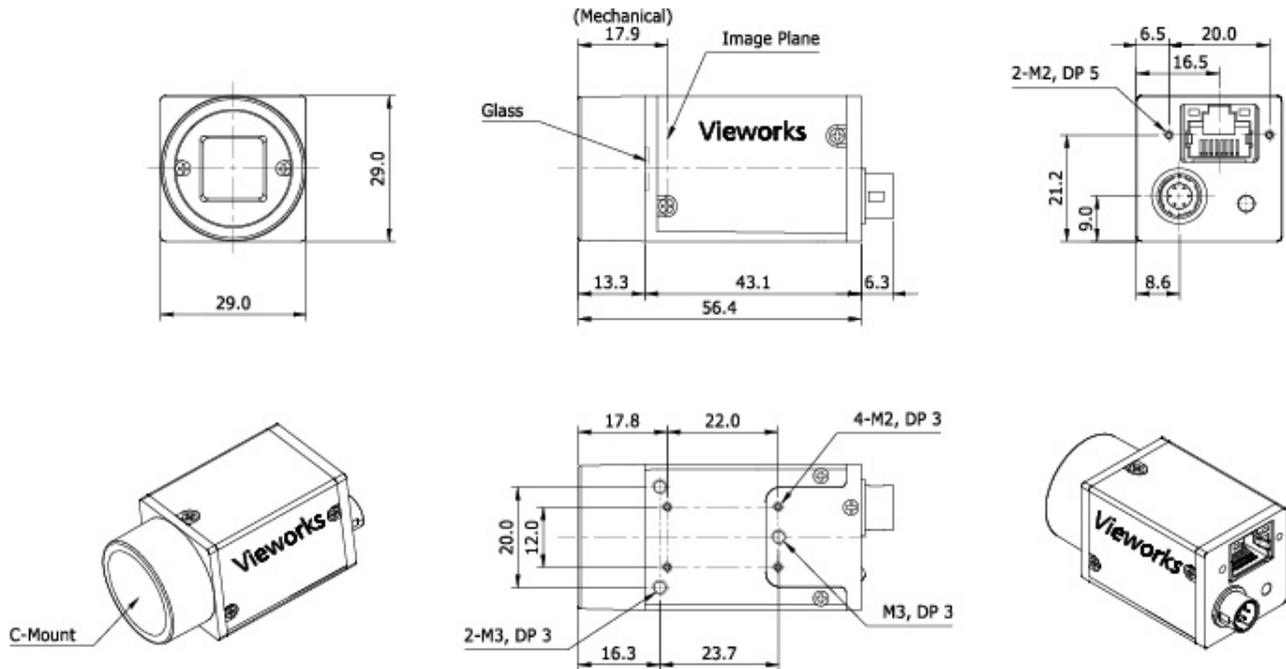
VQ-310G-120, 1300G-30 and 2MG-20 C-mount Mechanical Dimension
